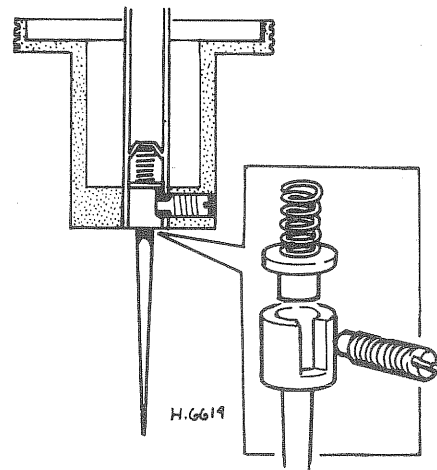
The spring-loaded needle assembly fitted to the later SU HS4 carburettors (Sec 15)
